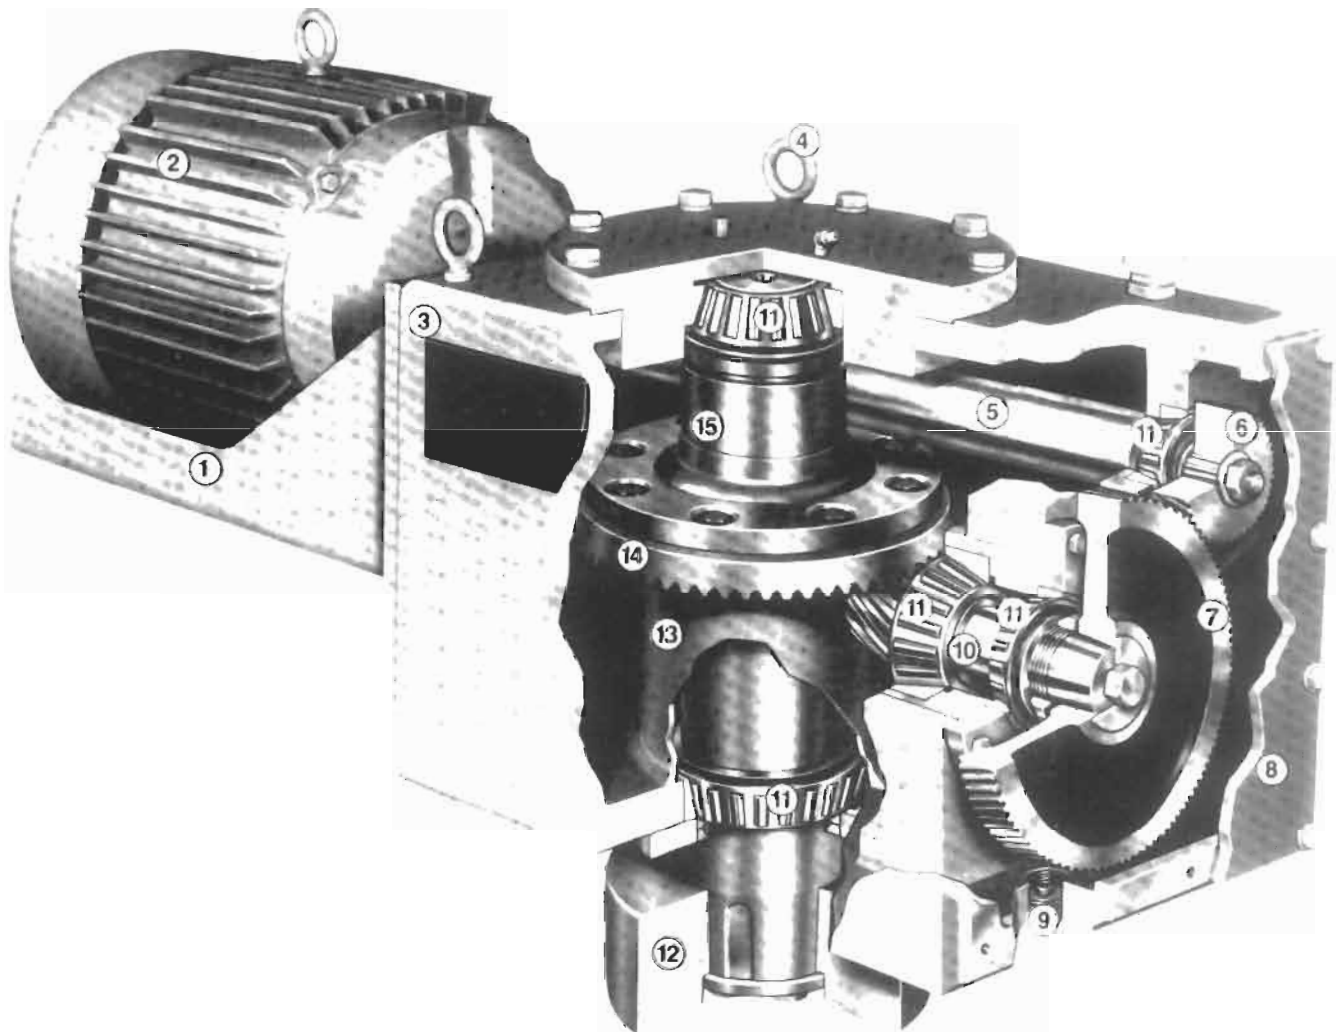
Right angle drive for vertical impeller shaft. By permission, Chemineer, Inc. Bulletin 711.
